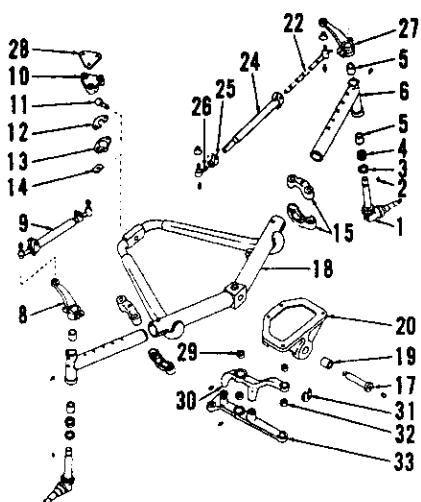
Exploded view of Series 424, 444, 2424 and 2444 narrow tread adjustable front axle and component parts.
